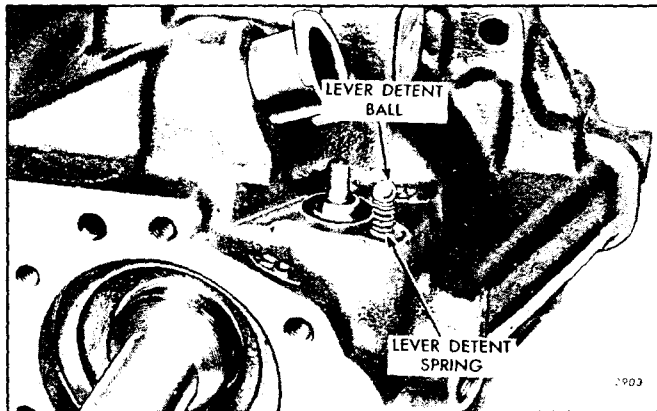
Location of Selector Valve Lever Detent Spring and Ball in Gear Housing
